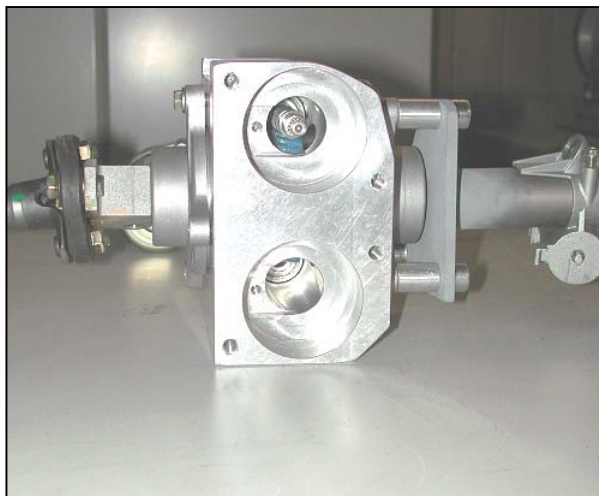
Load transmission to the steering shaft takes place via a non-inhibiting worm gear
